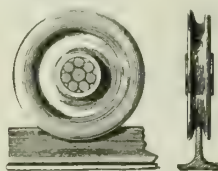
CAST IRON ROLLER BEARING WHEEL
